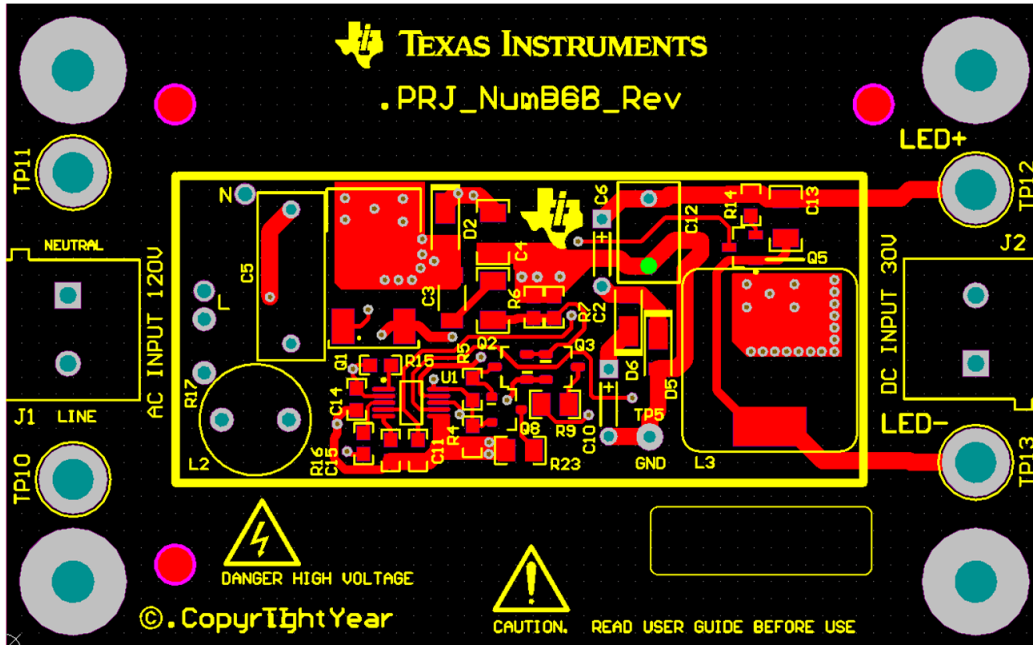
LM3445EVM-695 Top Layer Assembly Drawing (Top View)
